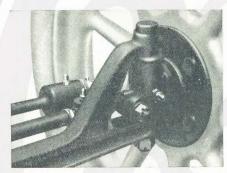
Left Side of the 11 H.P. "Standard" Front Axle. Showing the grease nipples on steering swivel and coupling rod joints.
